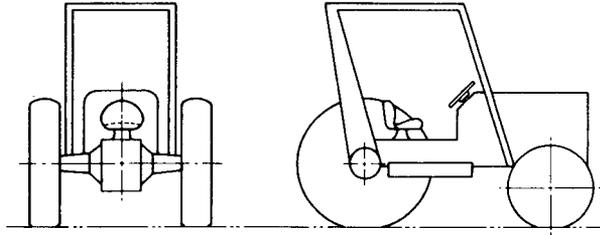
TRACTOR WITH TYPICAL PROTECTIVE FRAME AND OVERHEAD COVER
